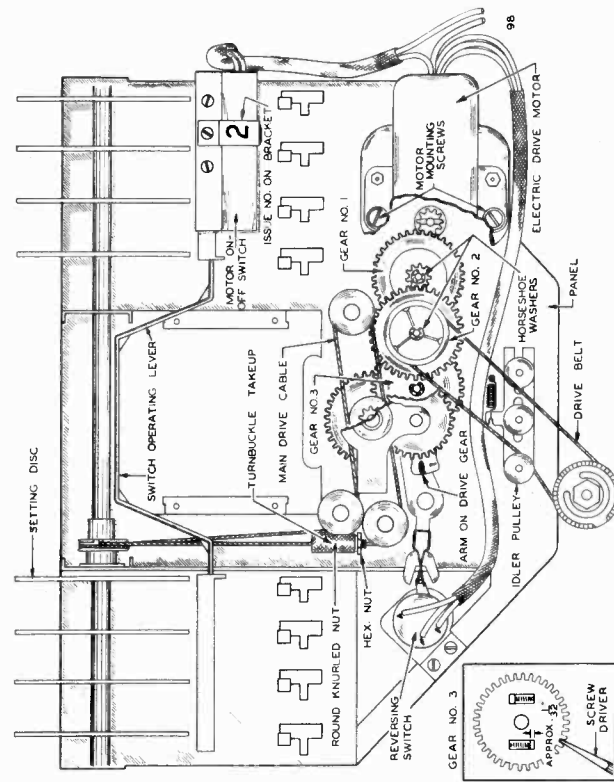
Rear View of Electric Drive Panel Showing Gear Assembly
